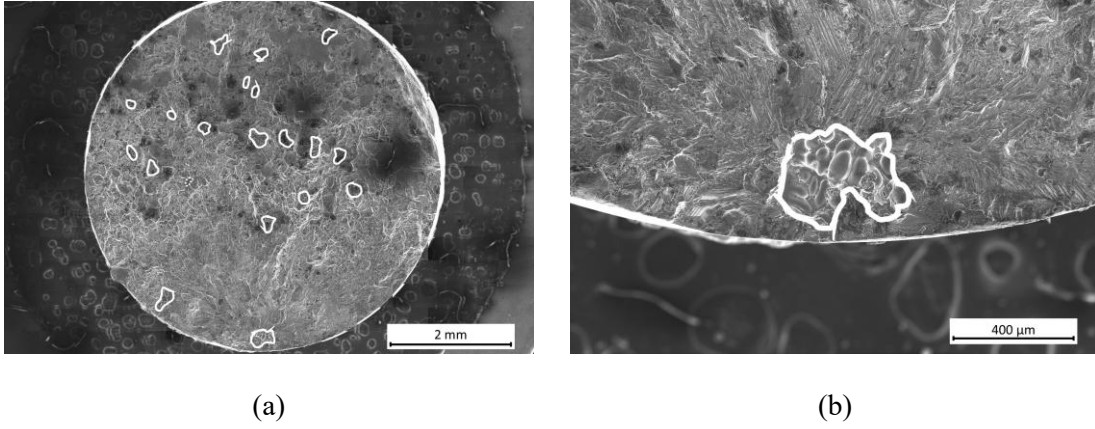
Representative fracture surface highlighting a) fractographic average porosity f_p and b) crack initiation pore.
